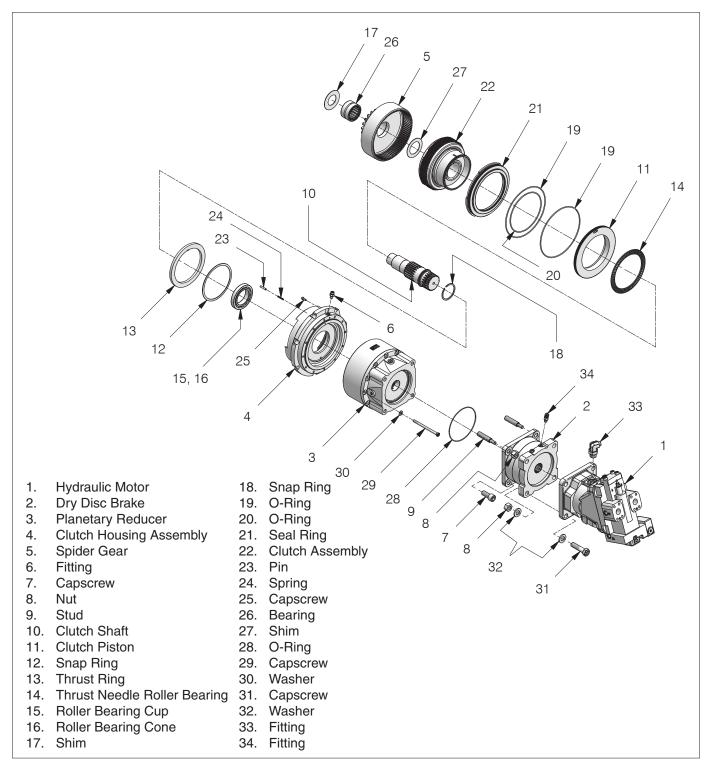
Motor Shaft Assembly (Shown with BRAKE-OFF Option)
